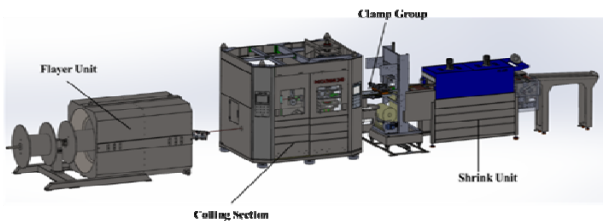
Cable Packaging Machine Sections Capable of Securing the Cable End Without Requiring Any Auxiliary Materials
